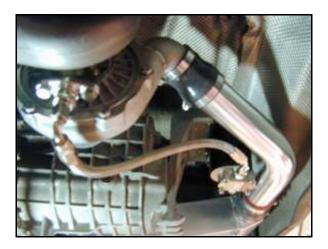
6AN Turbo Oil Drain Hose installed.
